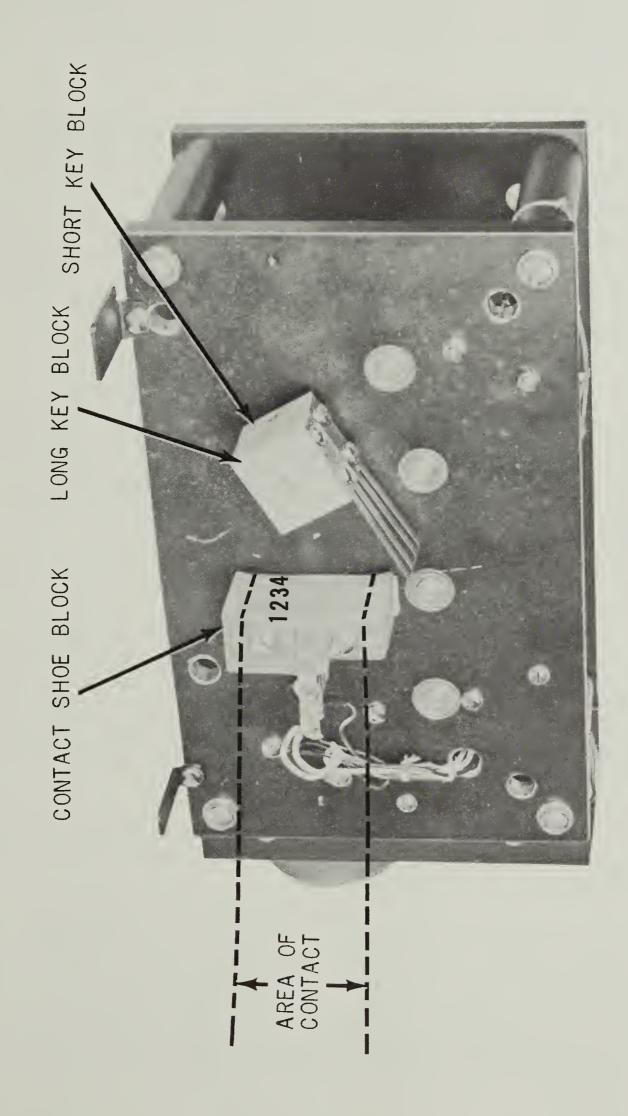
PROGRAM ASSEMBLY REAR VIEW
